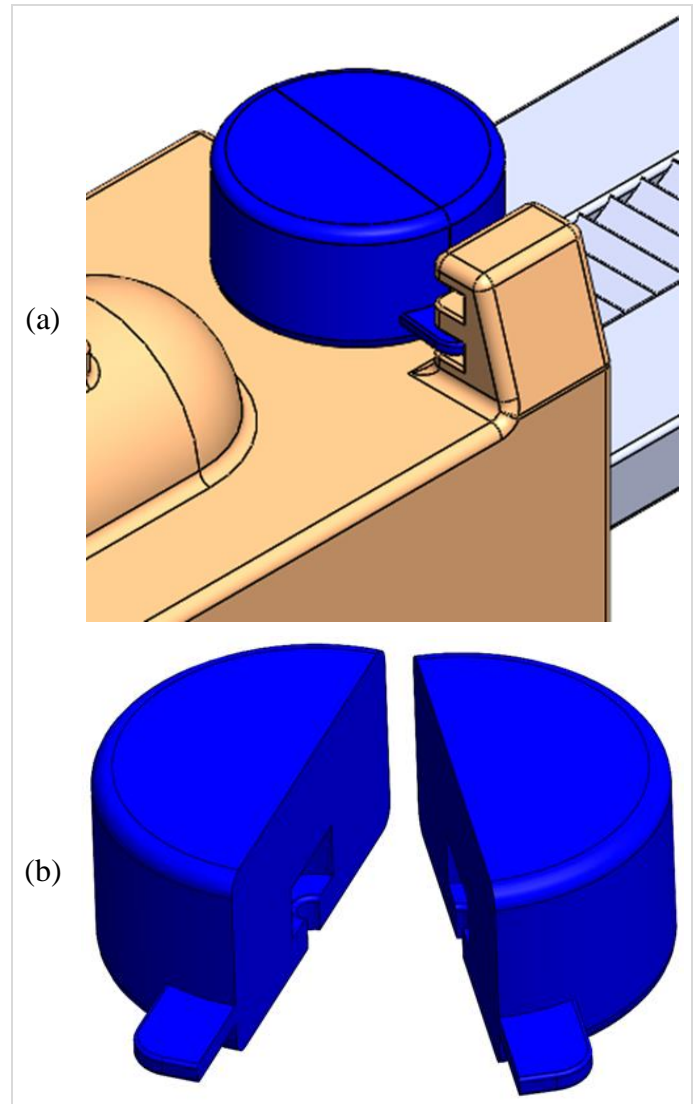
Button Cover in the Assembly (a) and Split View (b)
